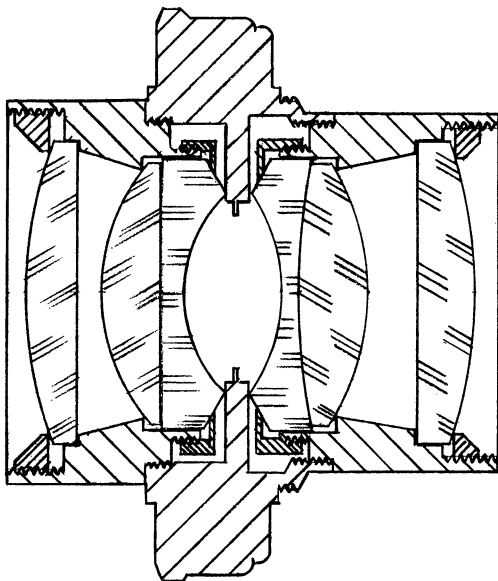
Sectional view of the Oscillo-Raptar Lens System.
